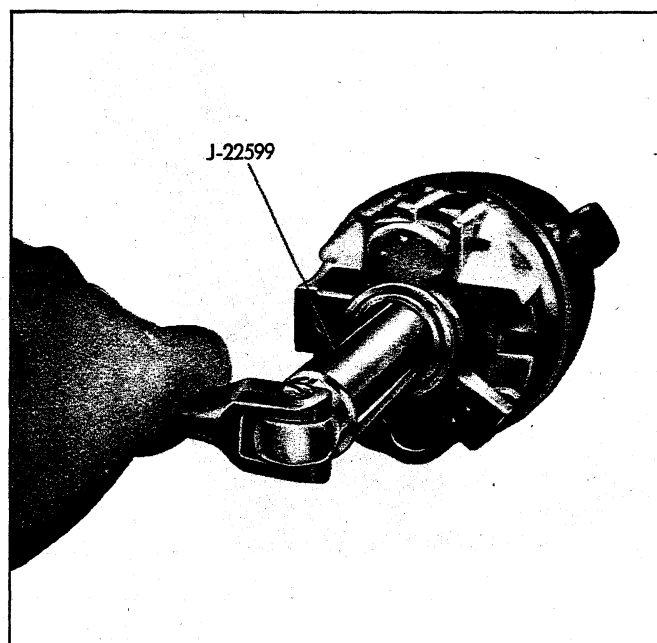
Removing Steering Shaft Bearing Lock Nut Using Lock Nut Wrench J-22599
